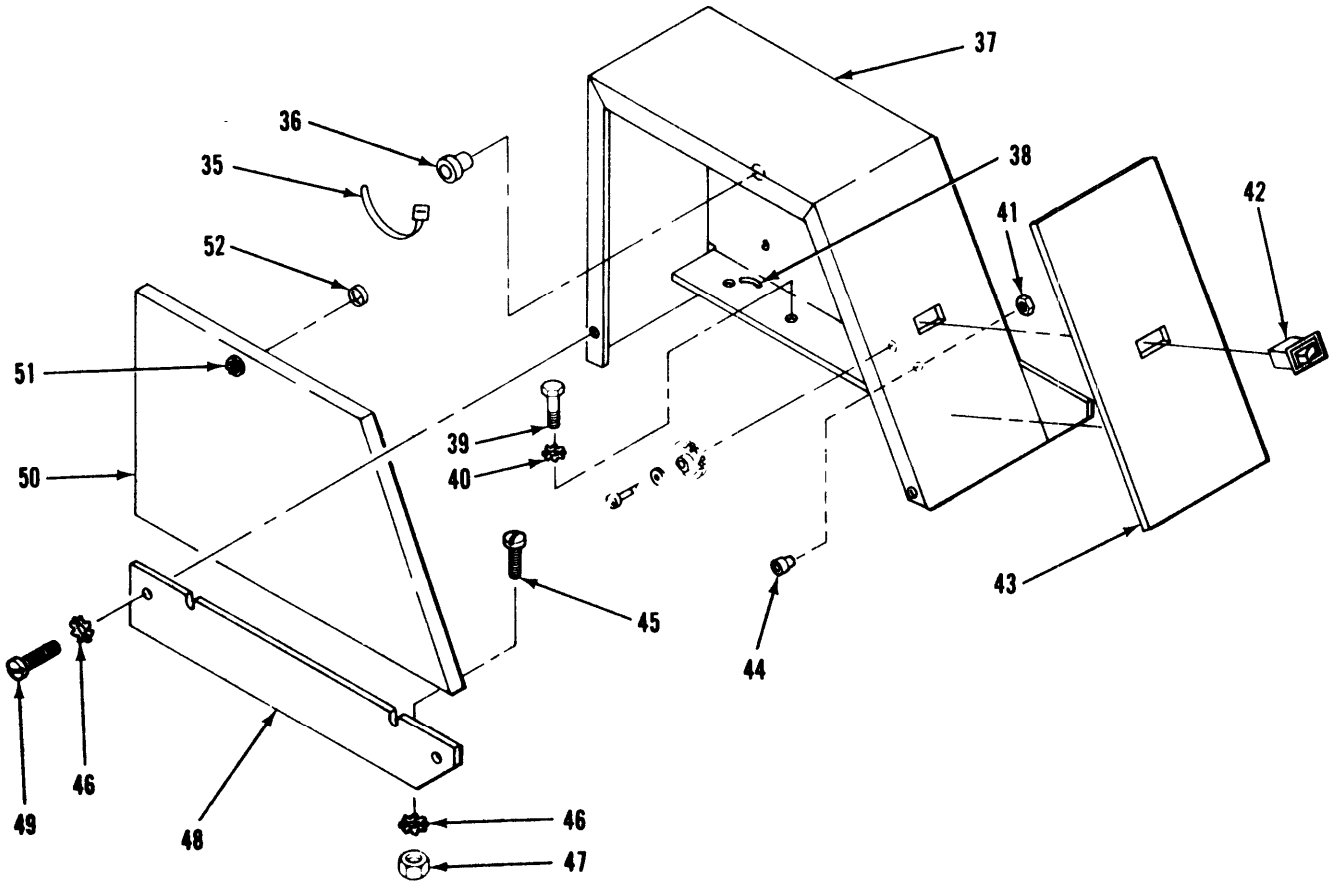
Machine Cabinet Group (Sheet 2 of 4)
